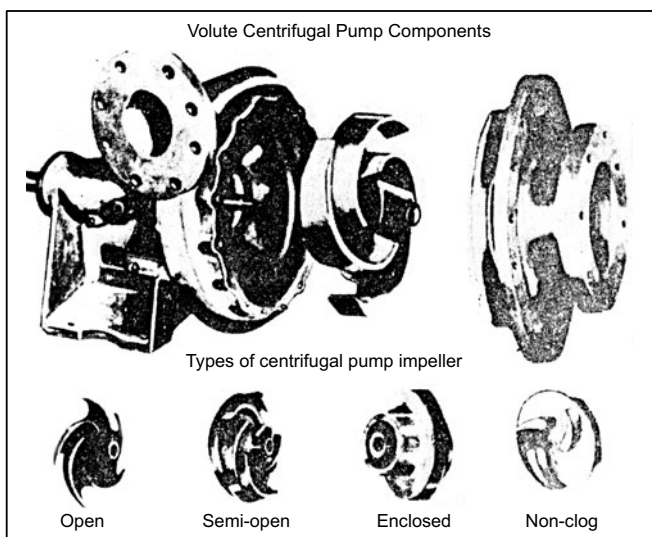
Top: An exploded view of a volute-type horizontal centrifugal pump
